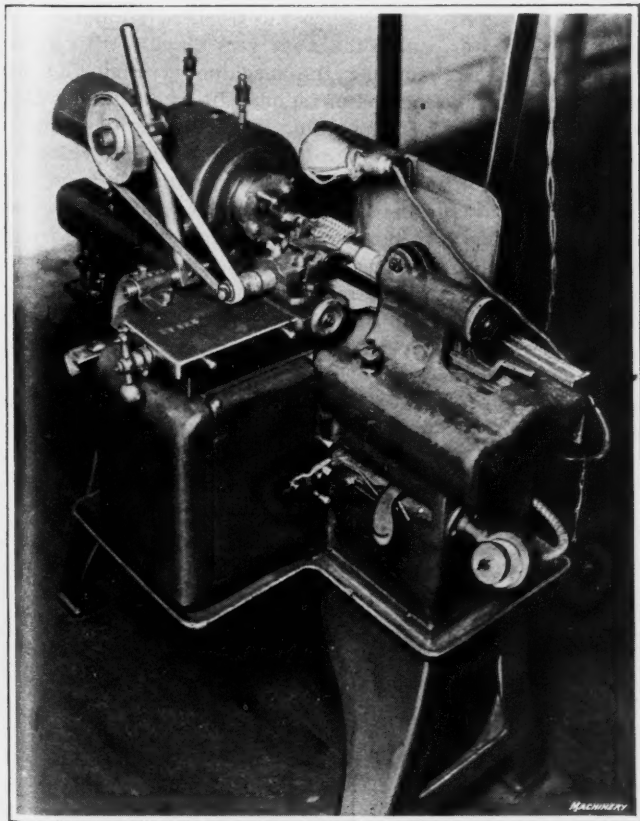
Special Grinding Machine designed and built by the Illinois Tool Works for grinding Hobbs to remove Distortion produced in hardening
